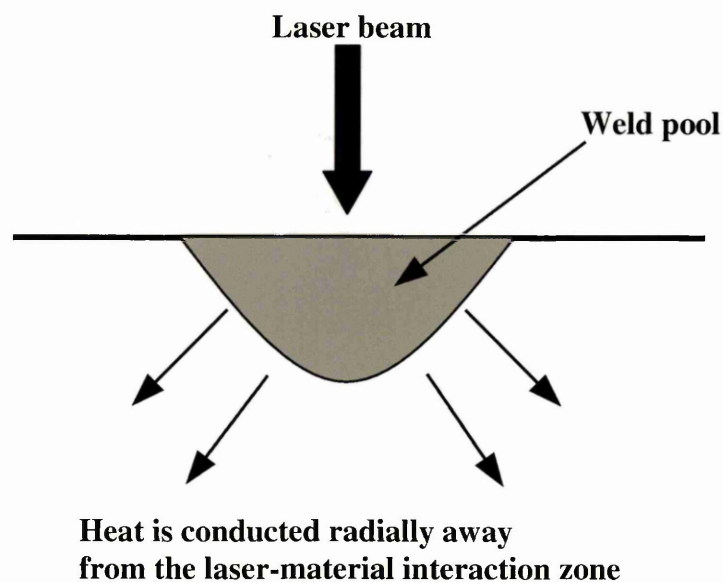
Heat dissipation in a conduction mode laser weld¹⁹
